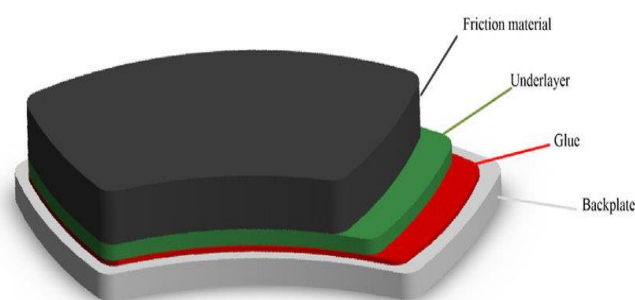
Schematic representation of different parts that make up a pad assembly [6].
